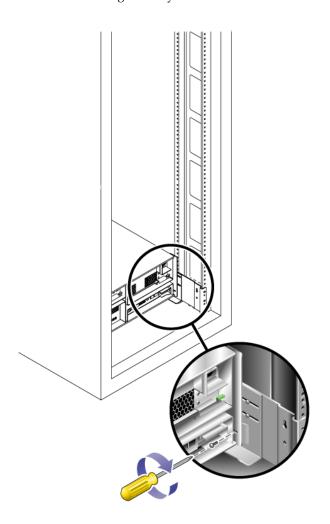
Securing the Tray to the Front of a Sun StorEdge Expansion Cabinet
